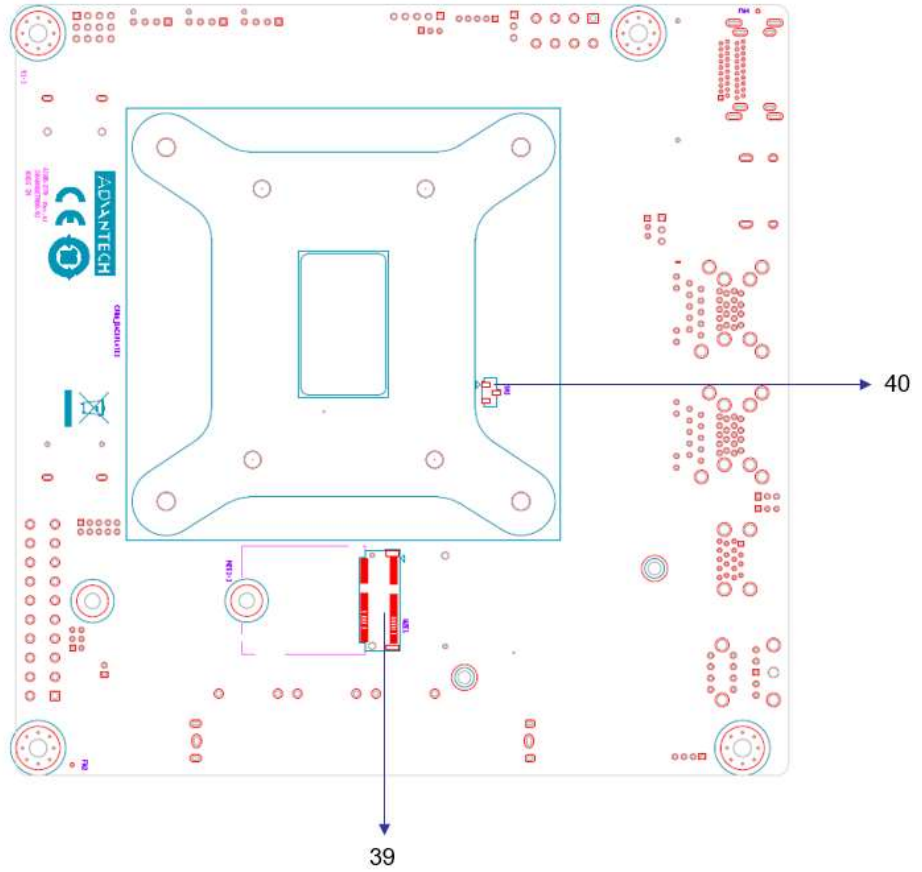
Jumper and Connector Locations (Bottom Side)
